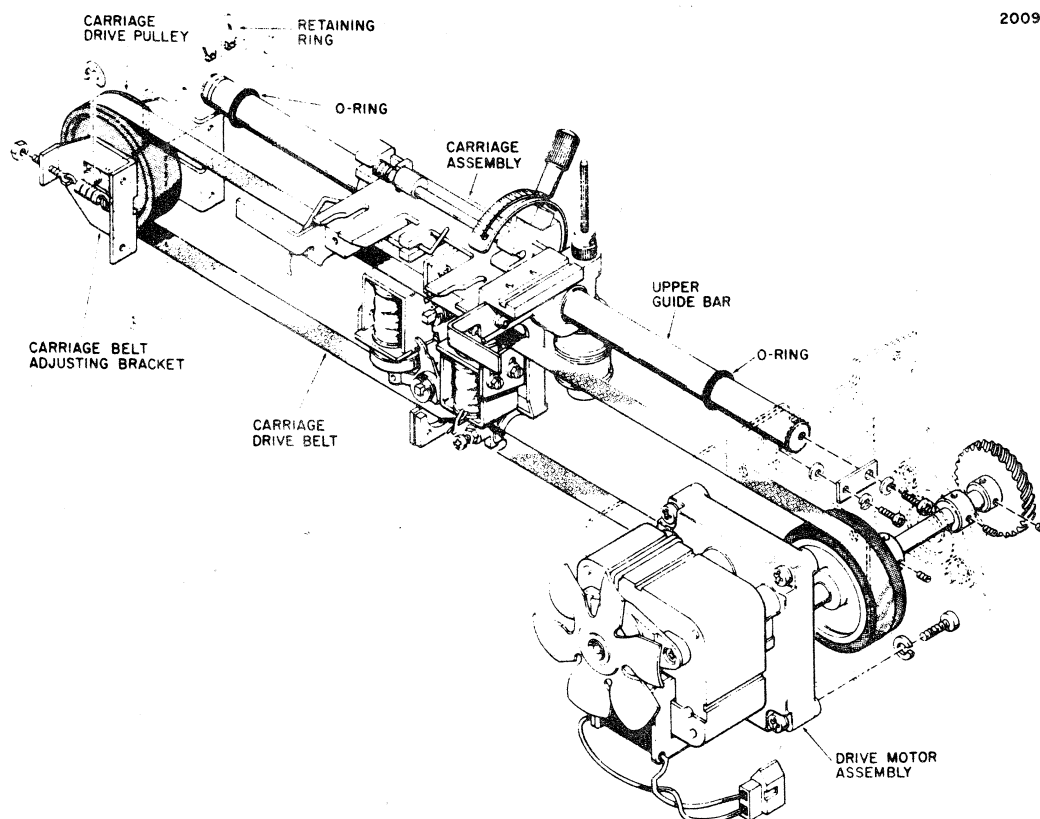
CARRIAGE ASSEMBLY, REMOVAL/REPLACEMENT
